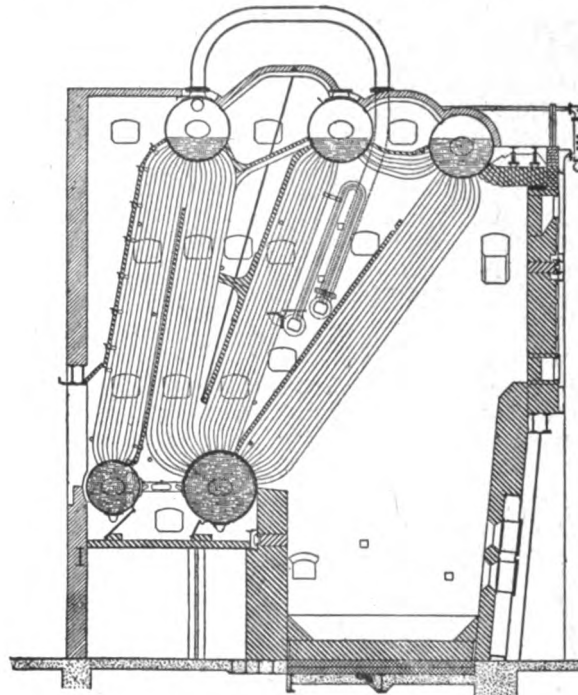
Babcock and Wilcox Integral Stirling-Tube Economizer.
